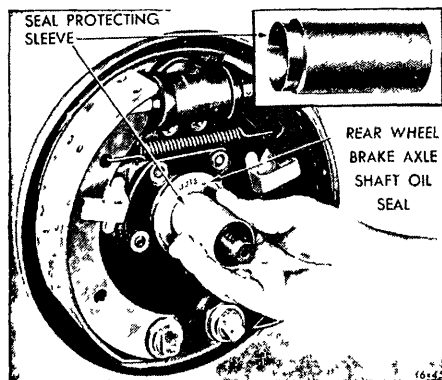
Installing axle shaft outer oil seal with special sleeve, 1946-52
